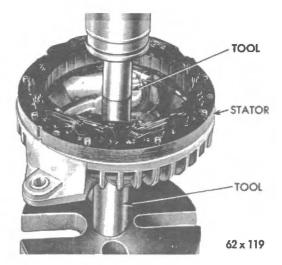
Removing rectifier end shield bearing (Tools CA-3770, CA-3770/1).
